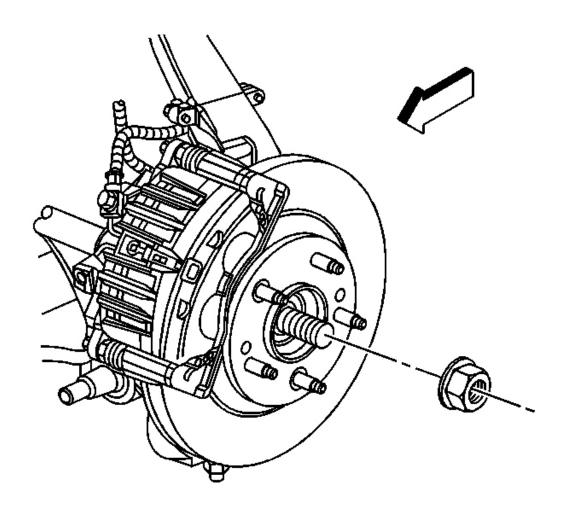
Removing/Installing Wheel Drive Shaft Nut Courtesy of GENERAL MOTORS CORP.
